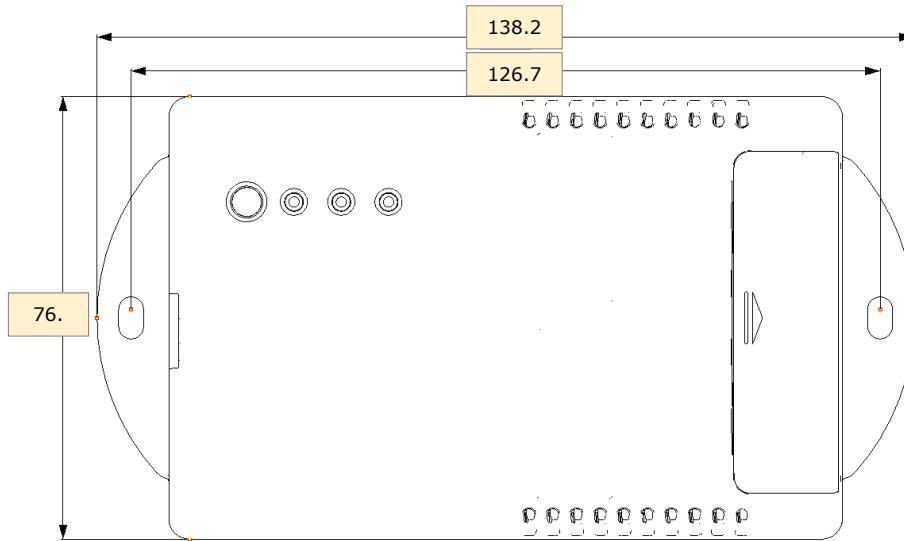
LDSBus 2CH NL Relay Dimension - Top View
